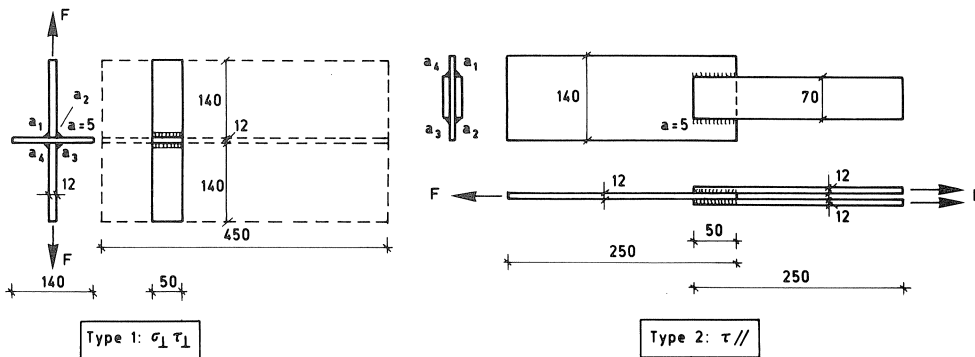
Test specimens for fillet welds, types 1 and 2; dimensions in mm.
